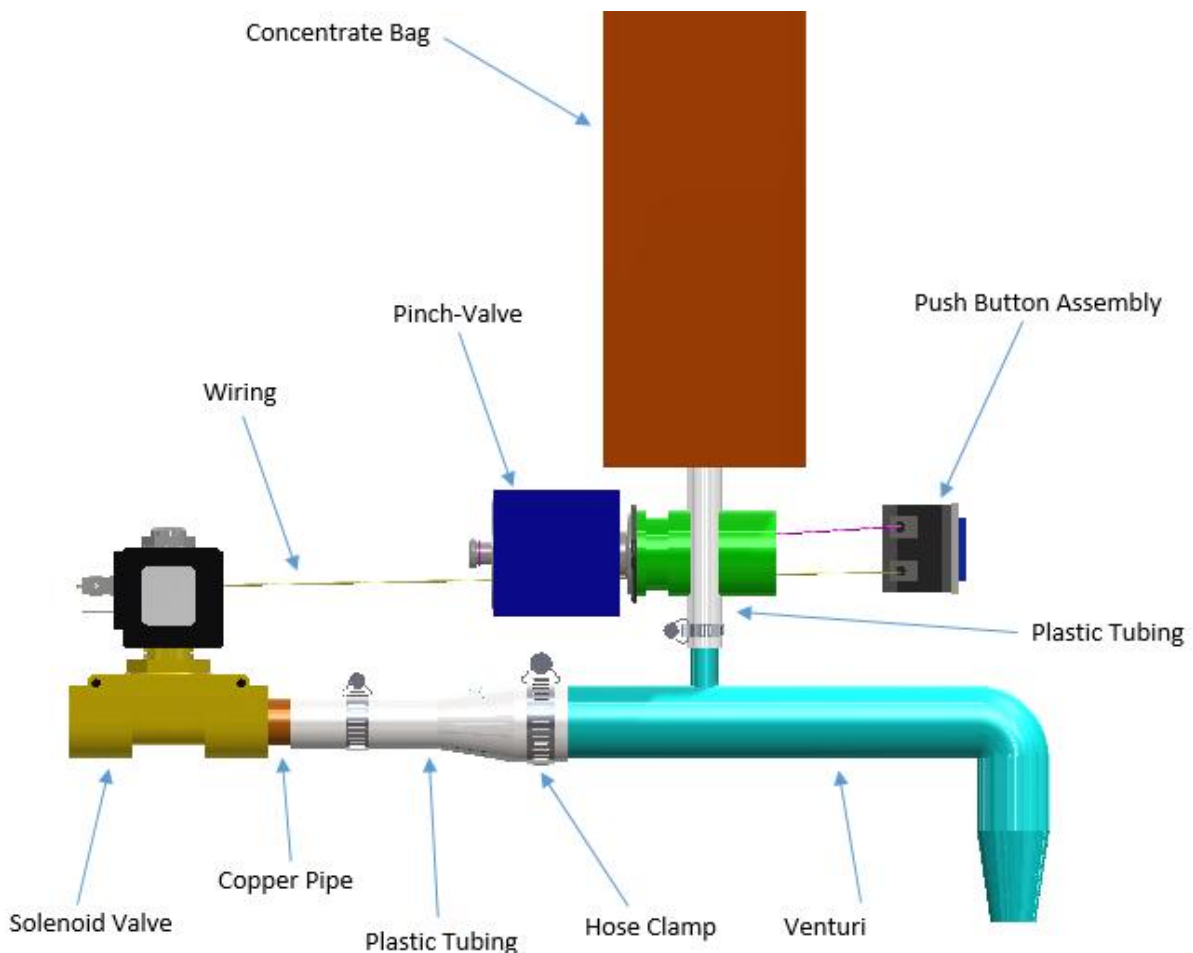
CAD model of completed final design with all components that were selected to move on to testing.
